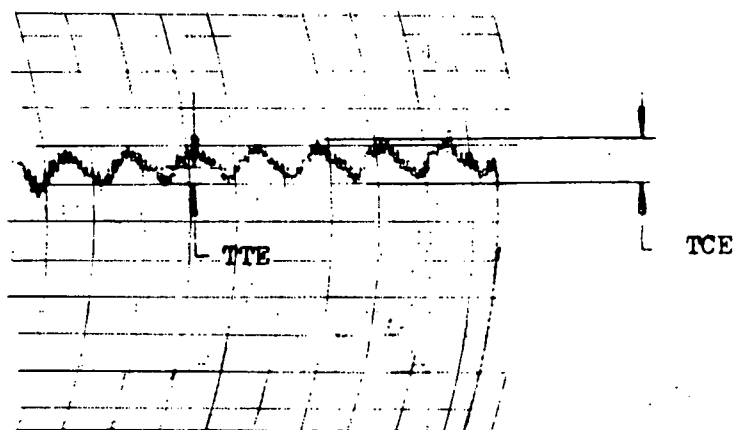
Composite Reading on Fellows No. 4 Redliner Gear Checker
